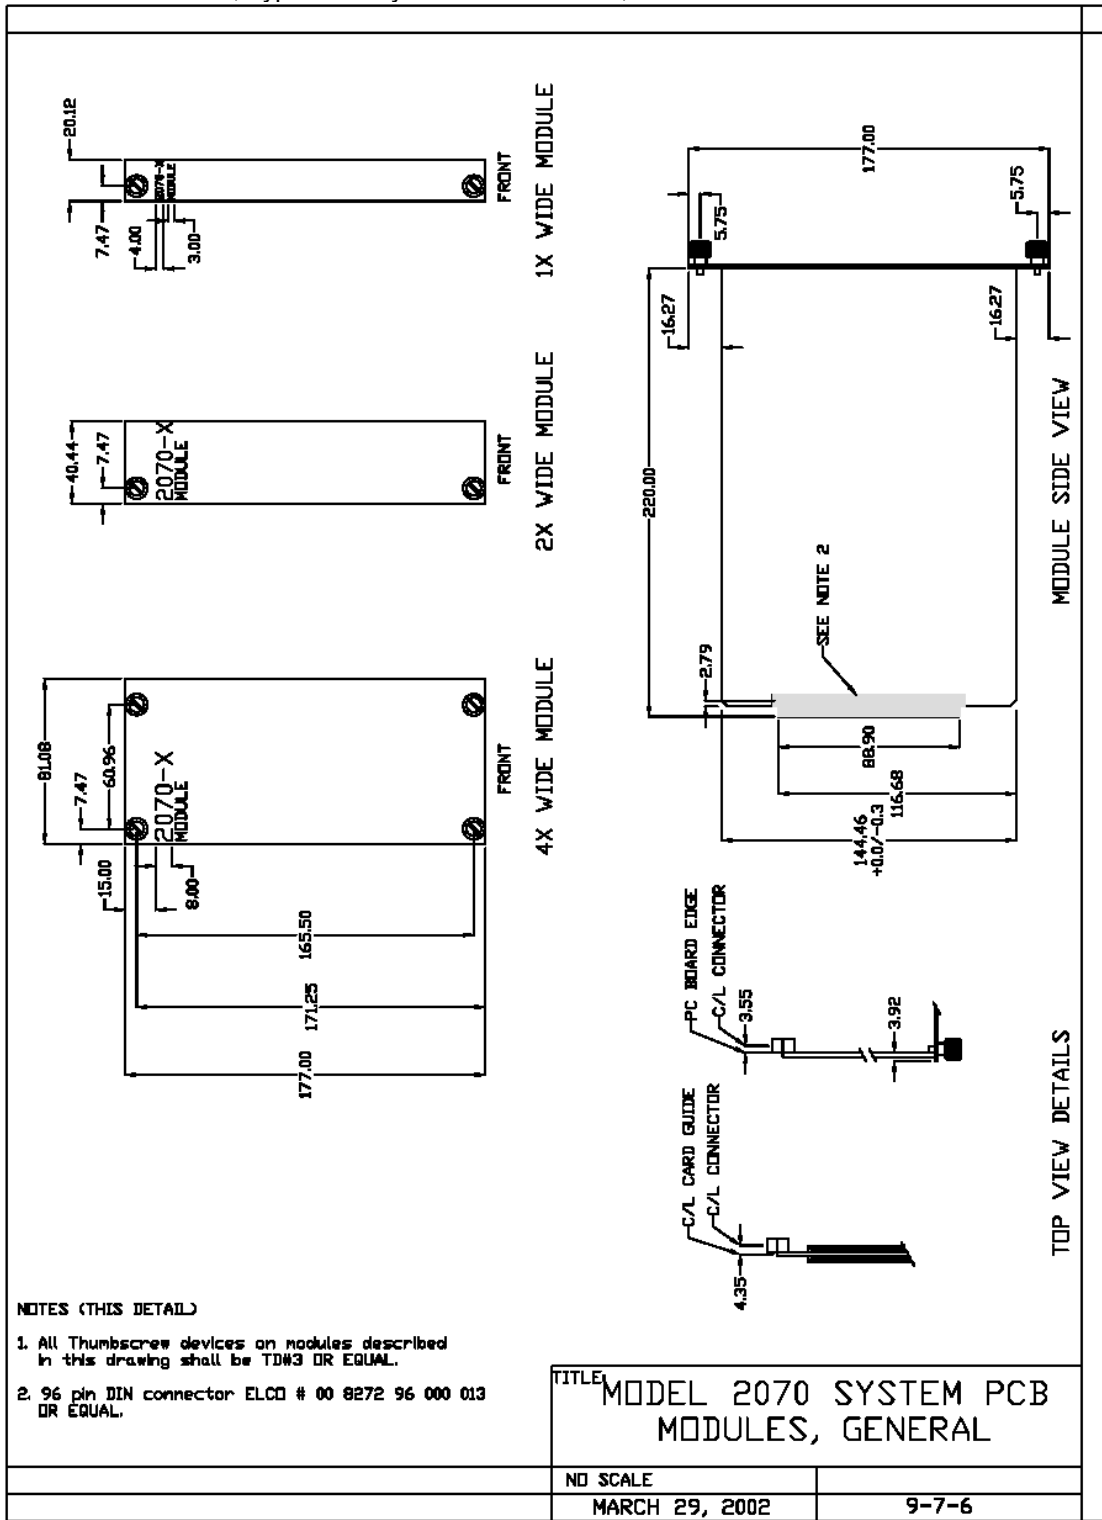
TEES DRAWING 9-7-6, Type 2070 System PCB Modules, General
